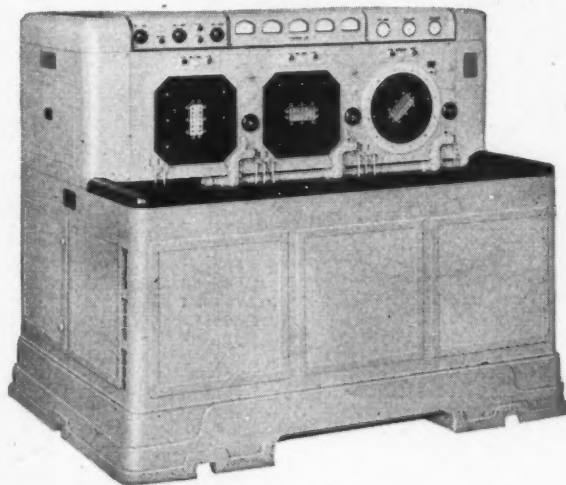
Completed TOCCO Induction Heating Machine with former base.
